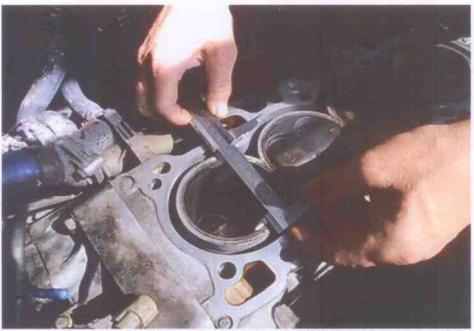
shows measurement being carried out to the bore of cylinder 4 of the Honda engine. The bore and stroke measurements of the Honda engine were carried out using a Vernier Caliper.
